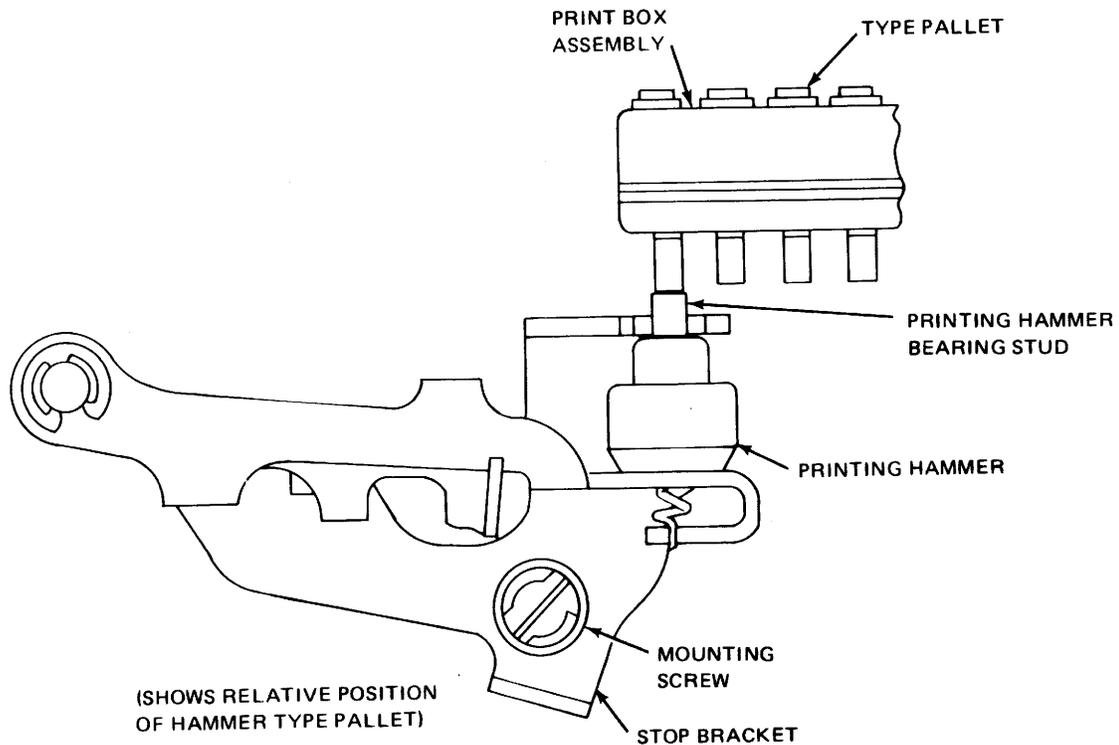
Printing Hammer Bearing Stud Adjustment.
